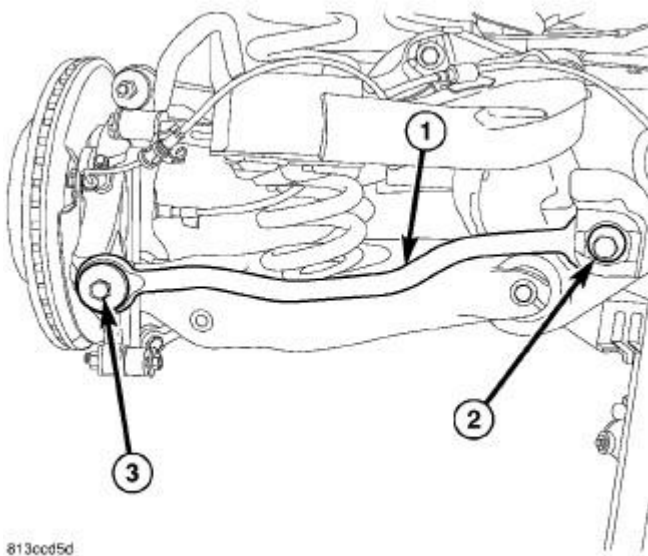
Toe Link, Mounting Bolt & Cam Bolt
